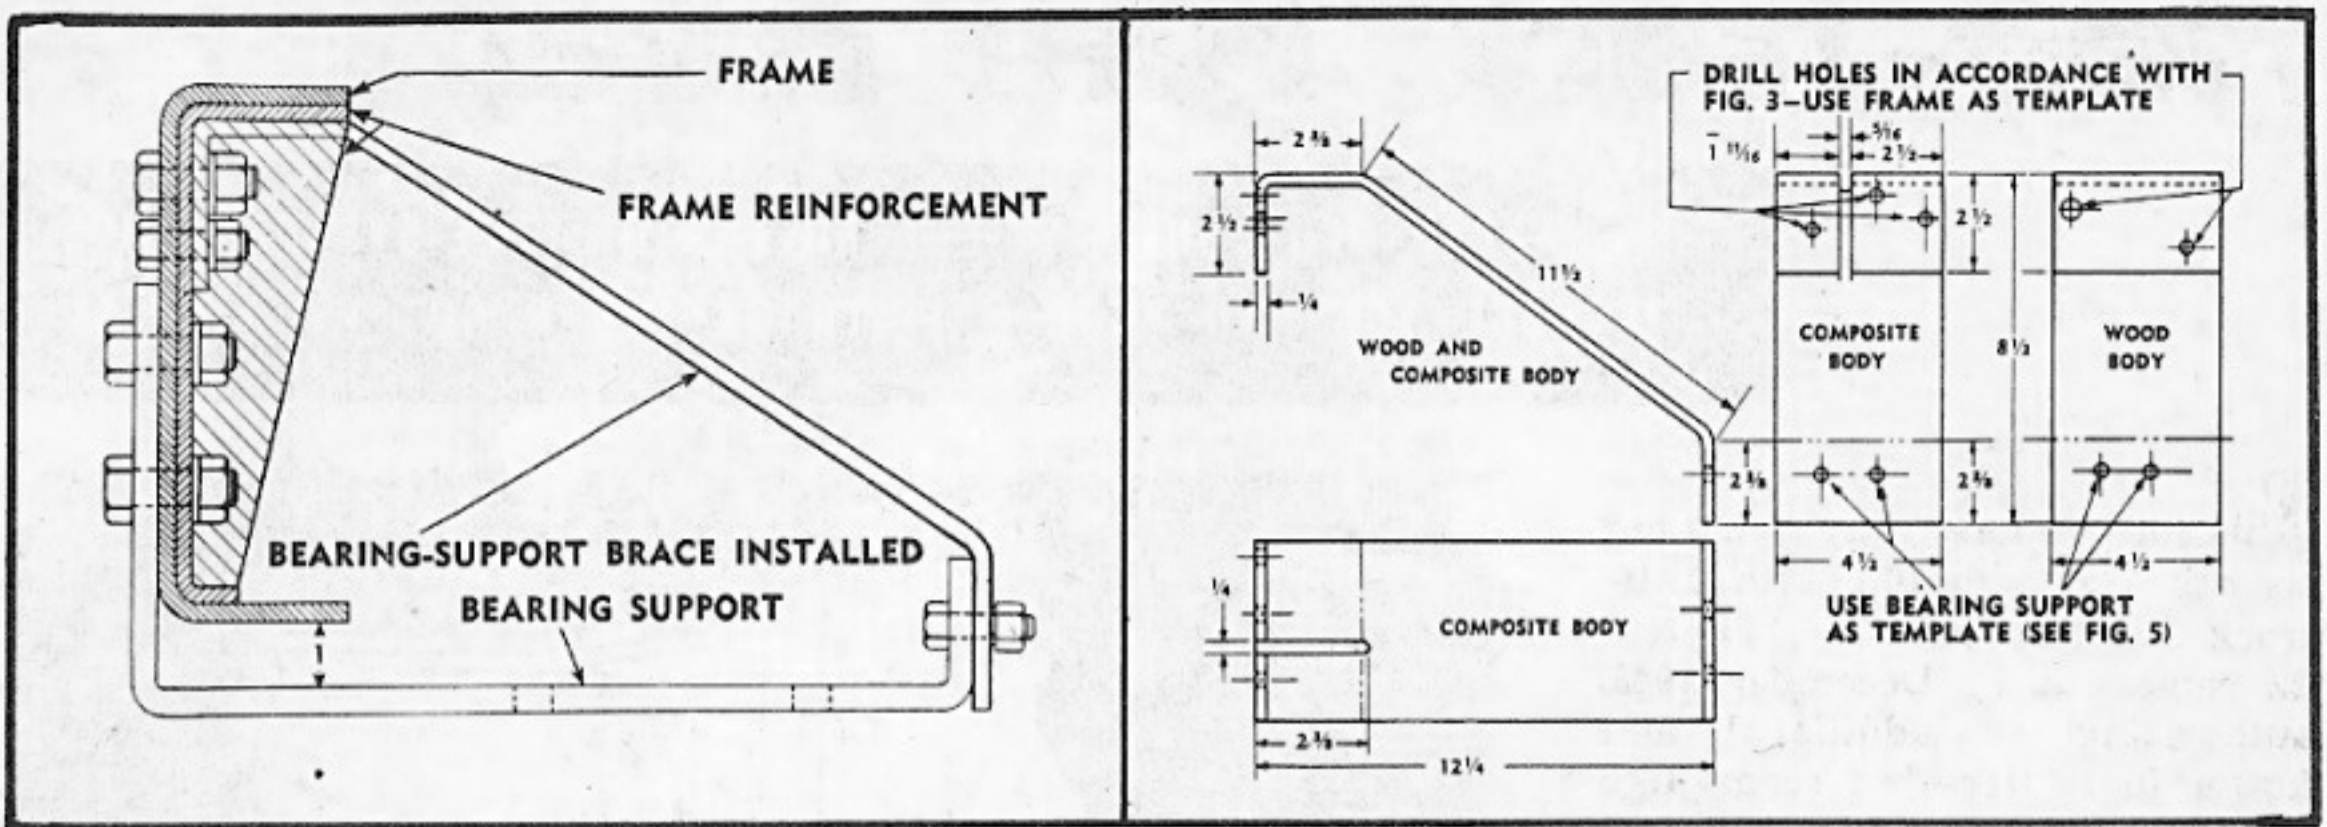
Install the bearing support on the frame. The bearing-support braces will be slightly different according to the vehicle's body type. Fig. 6—Remove rivet and bolt from frame for wood-type body or two bracket bolts from frame for composite-type body (see Fig. 3). Make and install (Fig. 5) bearing-support brace according to body type of vehicle.
